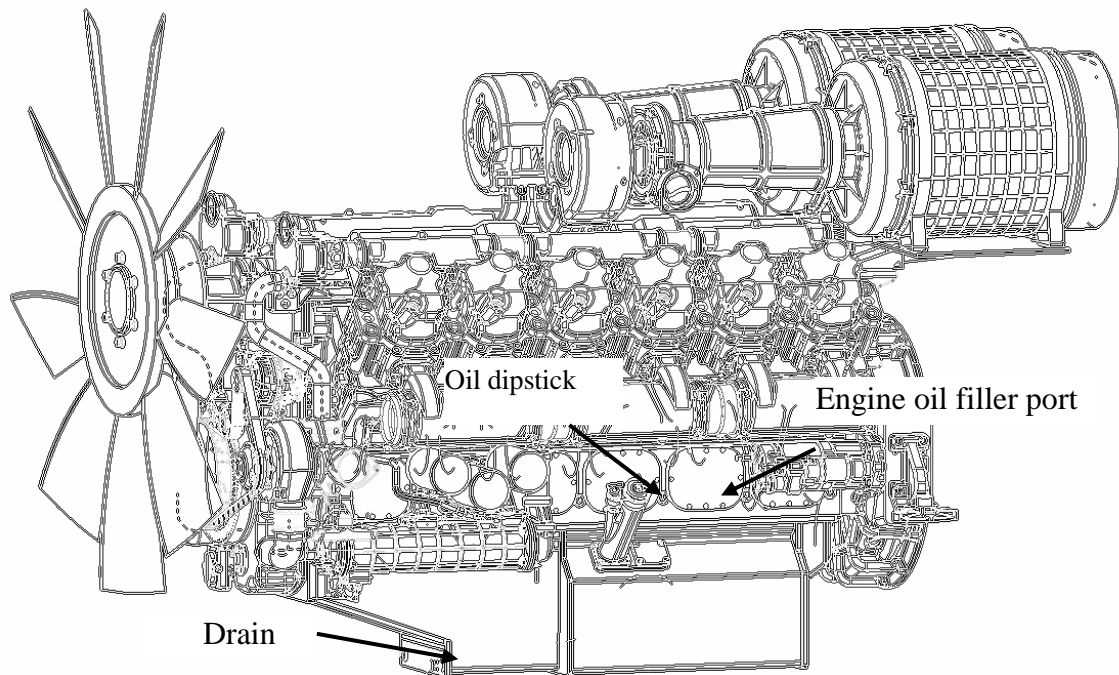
Filler Port, Drain Plug and Filter of Engine Oil
